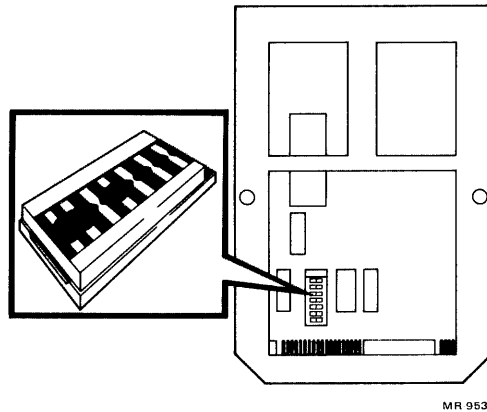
RD51 Disk Drive Read/Write Printed Circuit Board
